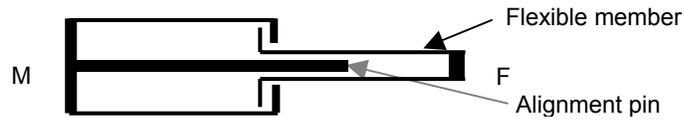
Simple sketch of two connector halves, M and F, having double locking tabs (and double engagement holes not shown), and an automatic alignment mechanism, a rigid alignment pin, that eliminates rigid guides that could produce premature tactile feedback.
